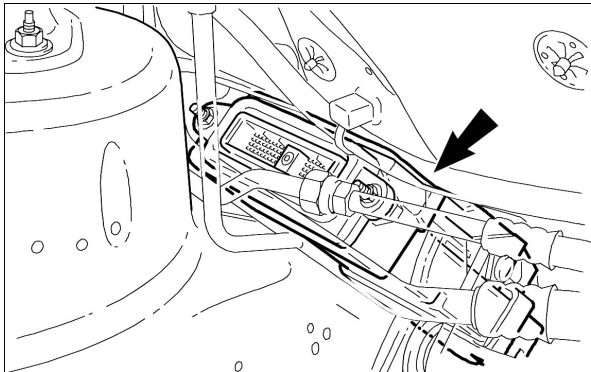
X-TYPE ENGINE CONTROL MODULE
